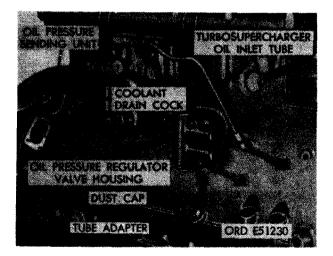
INSTALLING OIL PRESSURE REGULATOR VALVE HOUSING, TURBO-SUPERCHARGER OIL INLET TUBE, AND OIL DRAIN HOSE ADAPTER (EARLY MODEL ENGINES).
